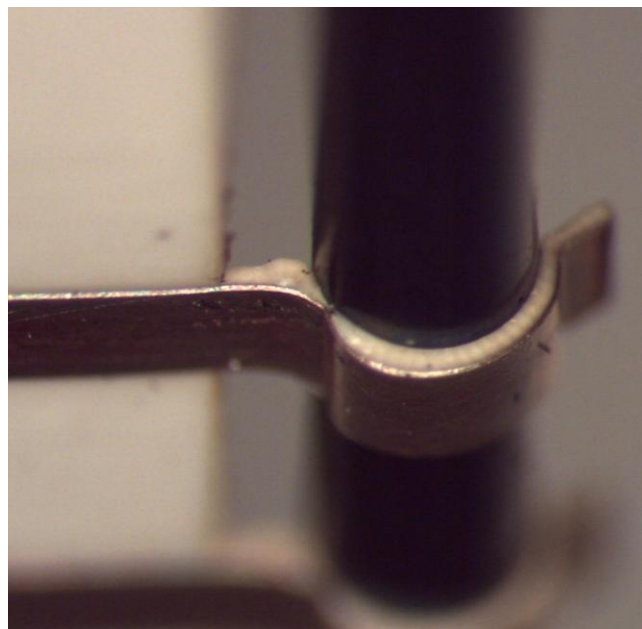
Resulting Formed Shape After First Trial of Spring Forming with Two Part Mold
